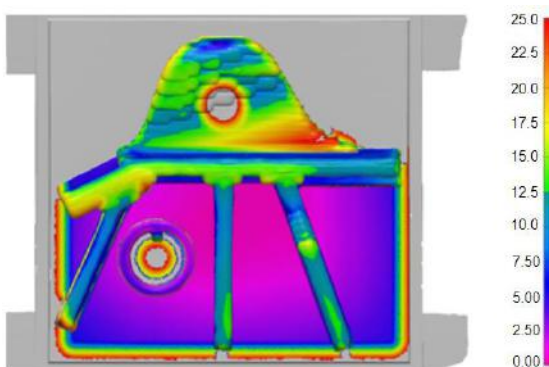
3D dimensional scan of the blank of the integrated demonstrator. Best fit compared to the 3D drawing of the finished part.
